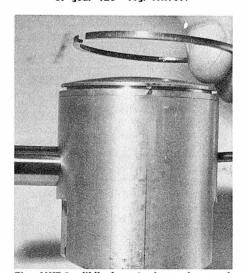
"L" shaped piston ring used in Super Rat. Ring is designed to provide maximum compression sealing and minimum friction.
